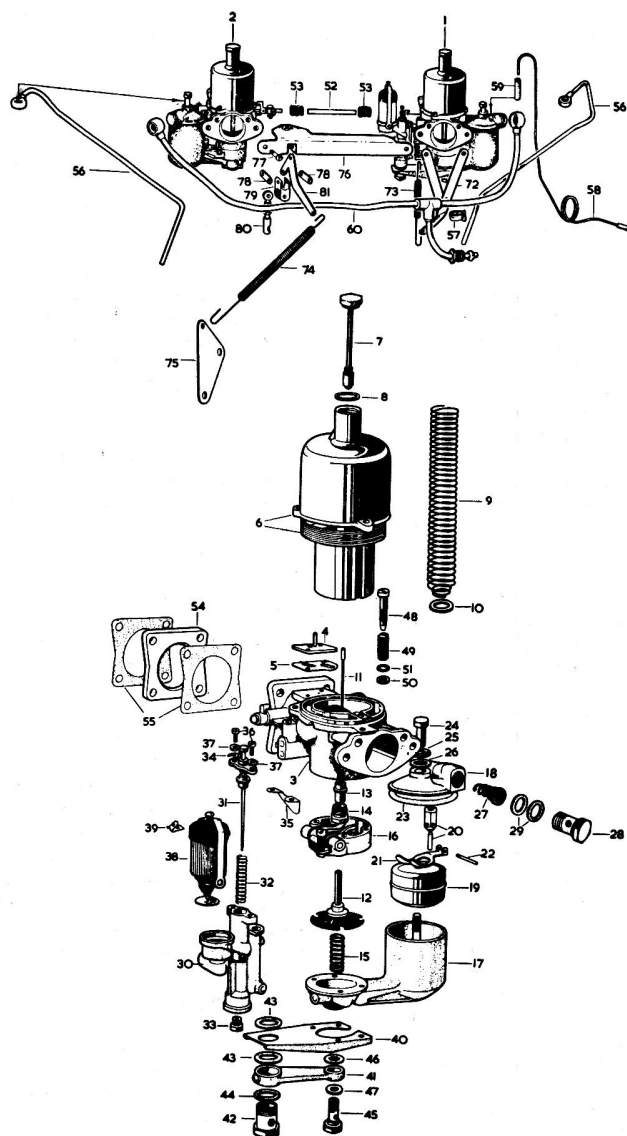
THE S.U. HD.6 CARBURETTOR (FRONT)
